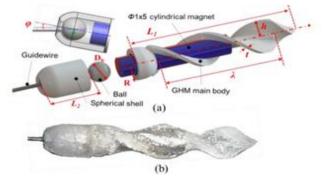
A micro robot with driving force provided by guide wire (a) structural design of the robot (b) manufacturing the robot by 3D printing [4].
